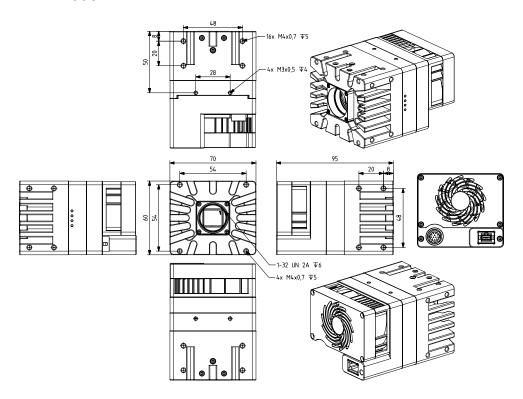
dimensional drawing MX161l203l245xG-SY-X4G3-xxx
